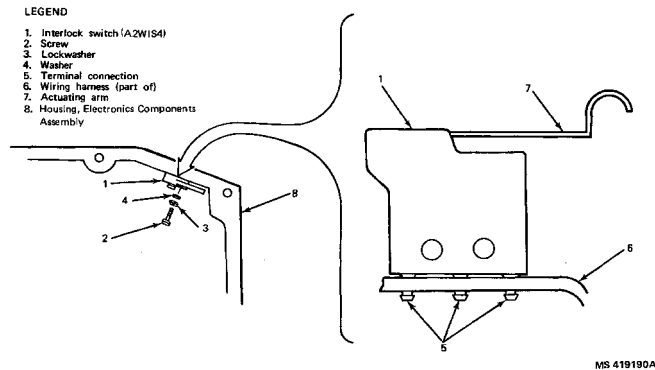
Removal and Installation of Interlock Switch (A2W1S4)
